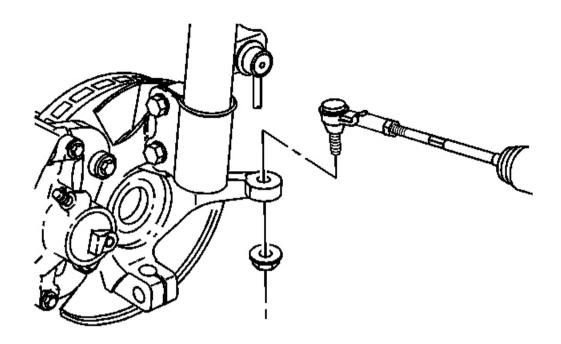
Tie Rod To Knuckle View Courtesy of GENERAL MOTORS CORP.
